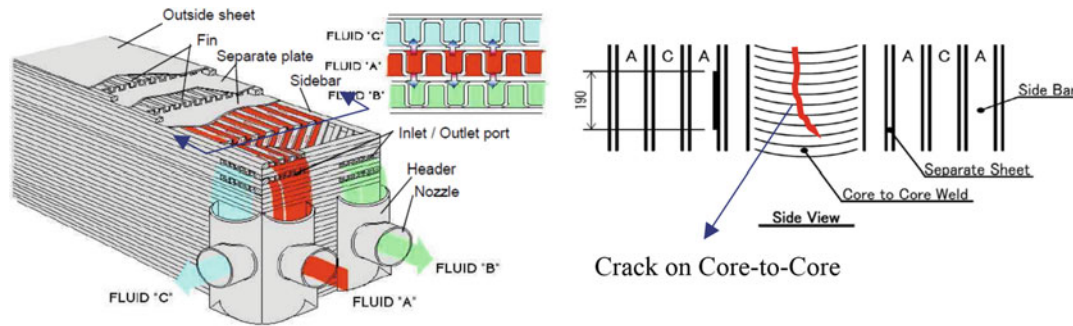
Crack on core-to-core weld in cold box
